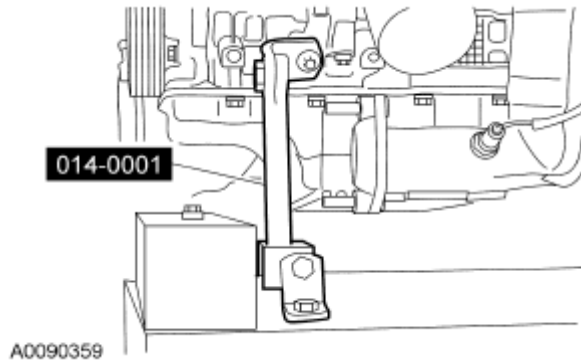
Securing Engine To Powertrain Lift Using Special Tool (014-0001)
